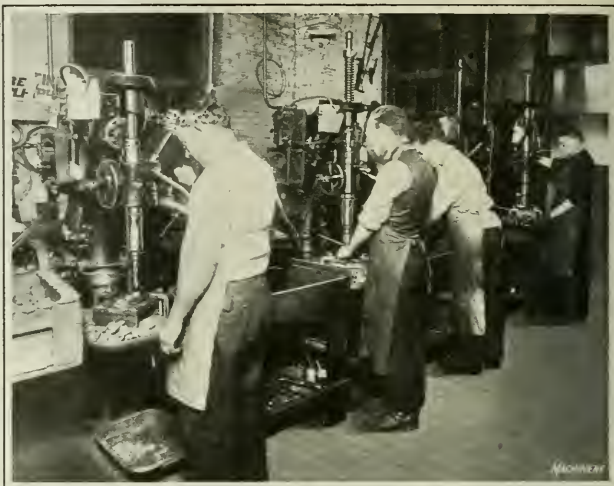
Three Drilling Machines and a Tapping Machine grouped to obtain High Production Rates on a Small Flanged Part
